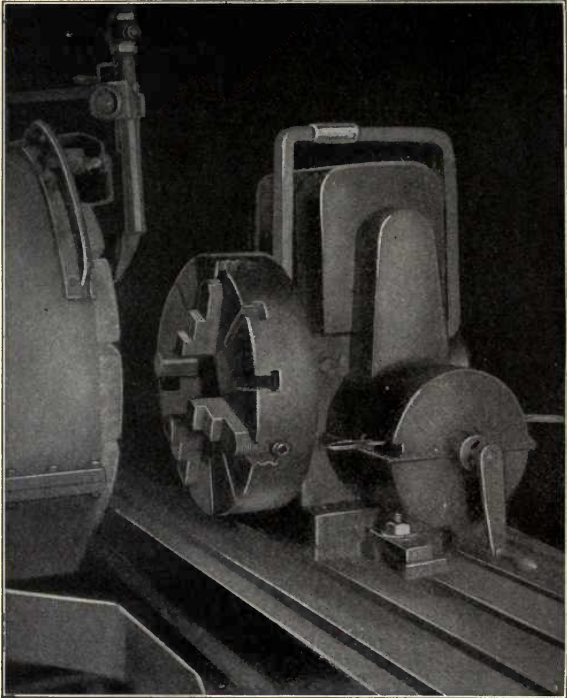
Rotary grinding fixture for use on the side surfacer.
